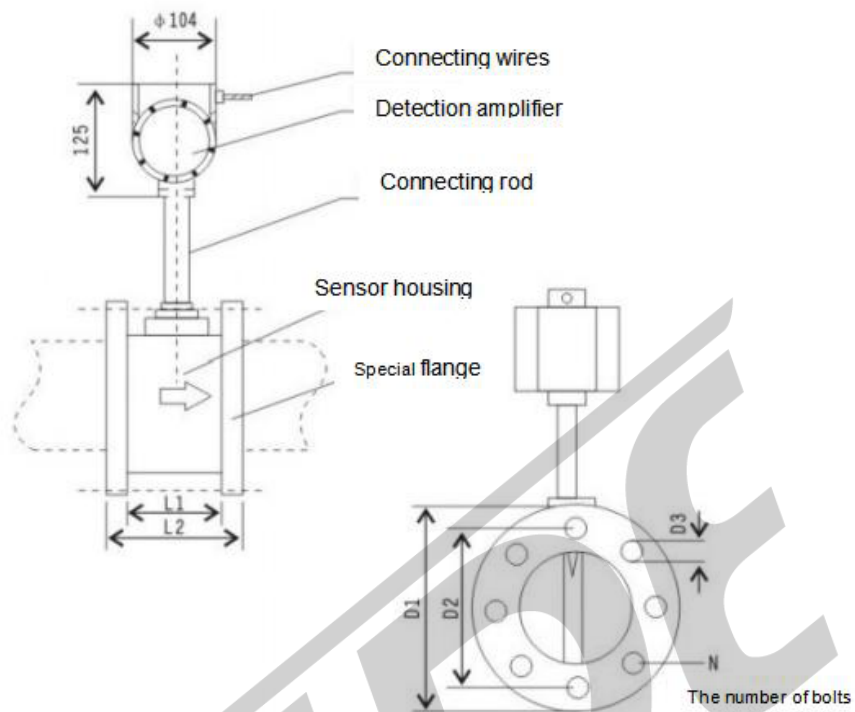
the external dimensions of the flanged clamping type vortex flowmeter
